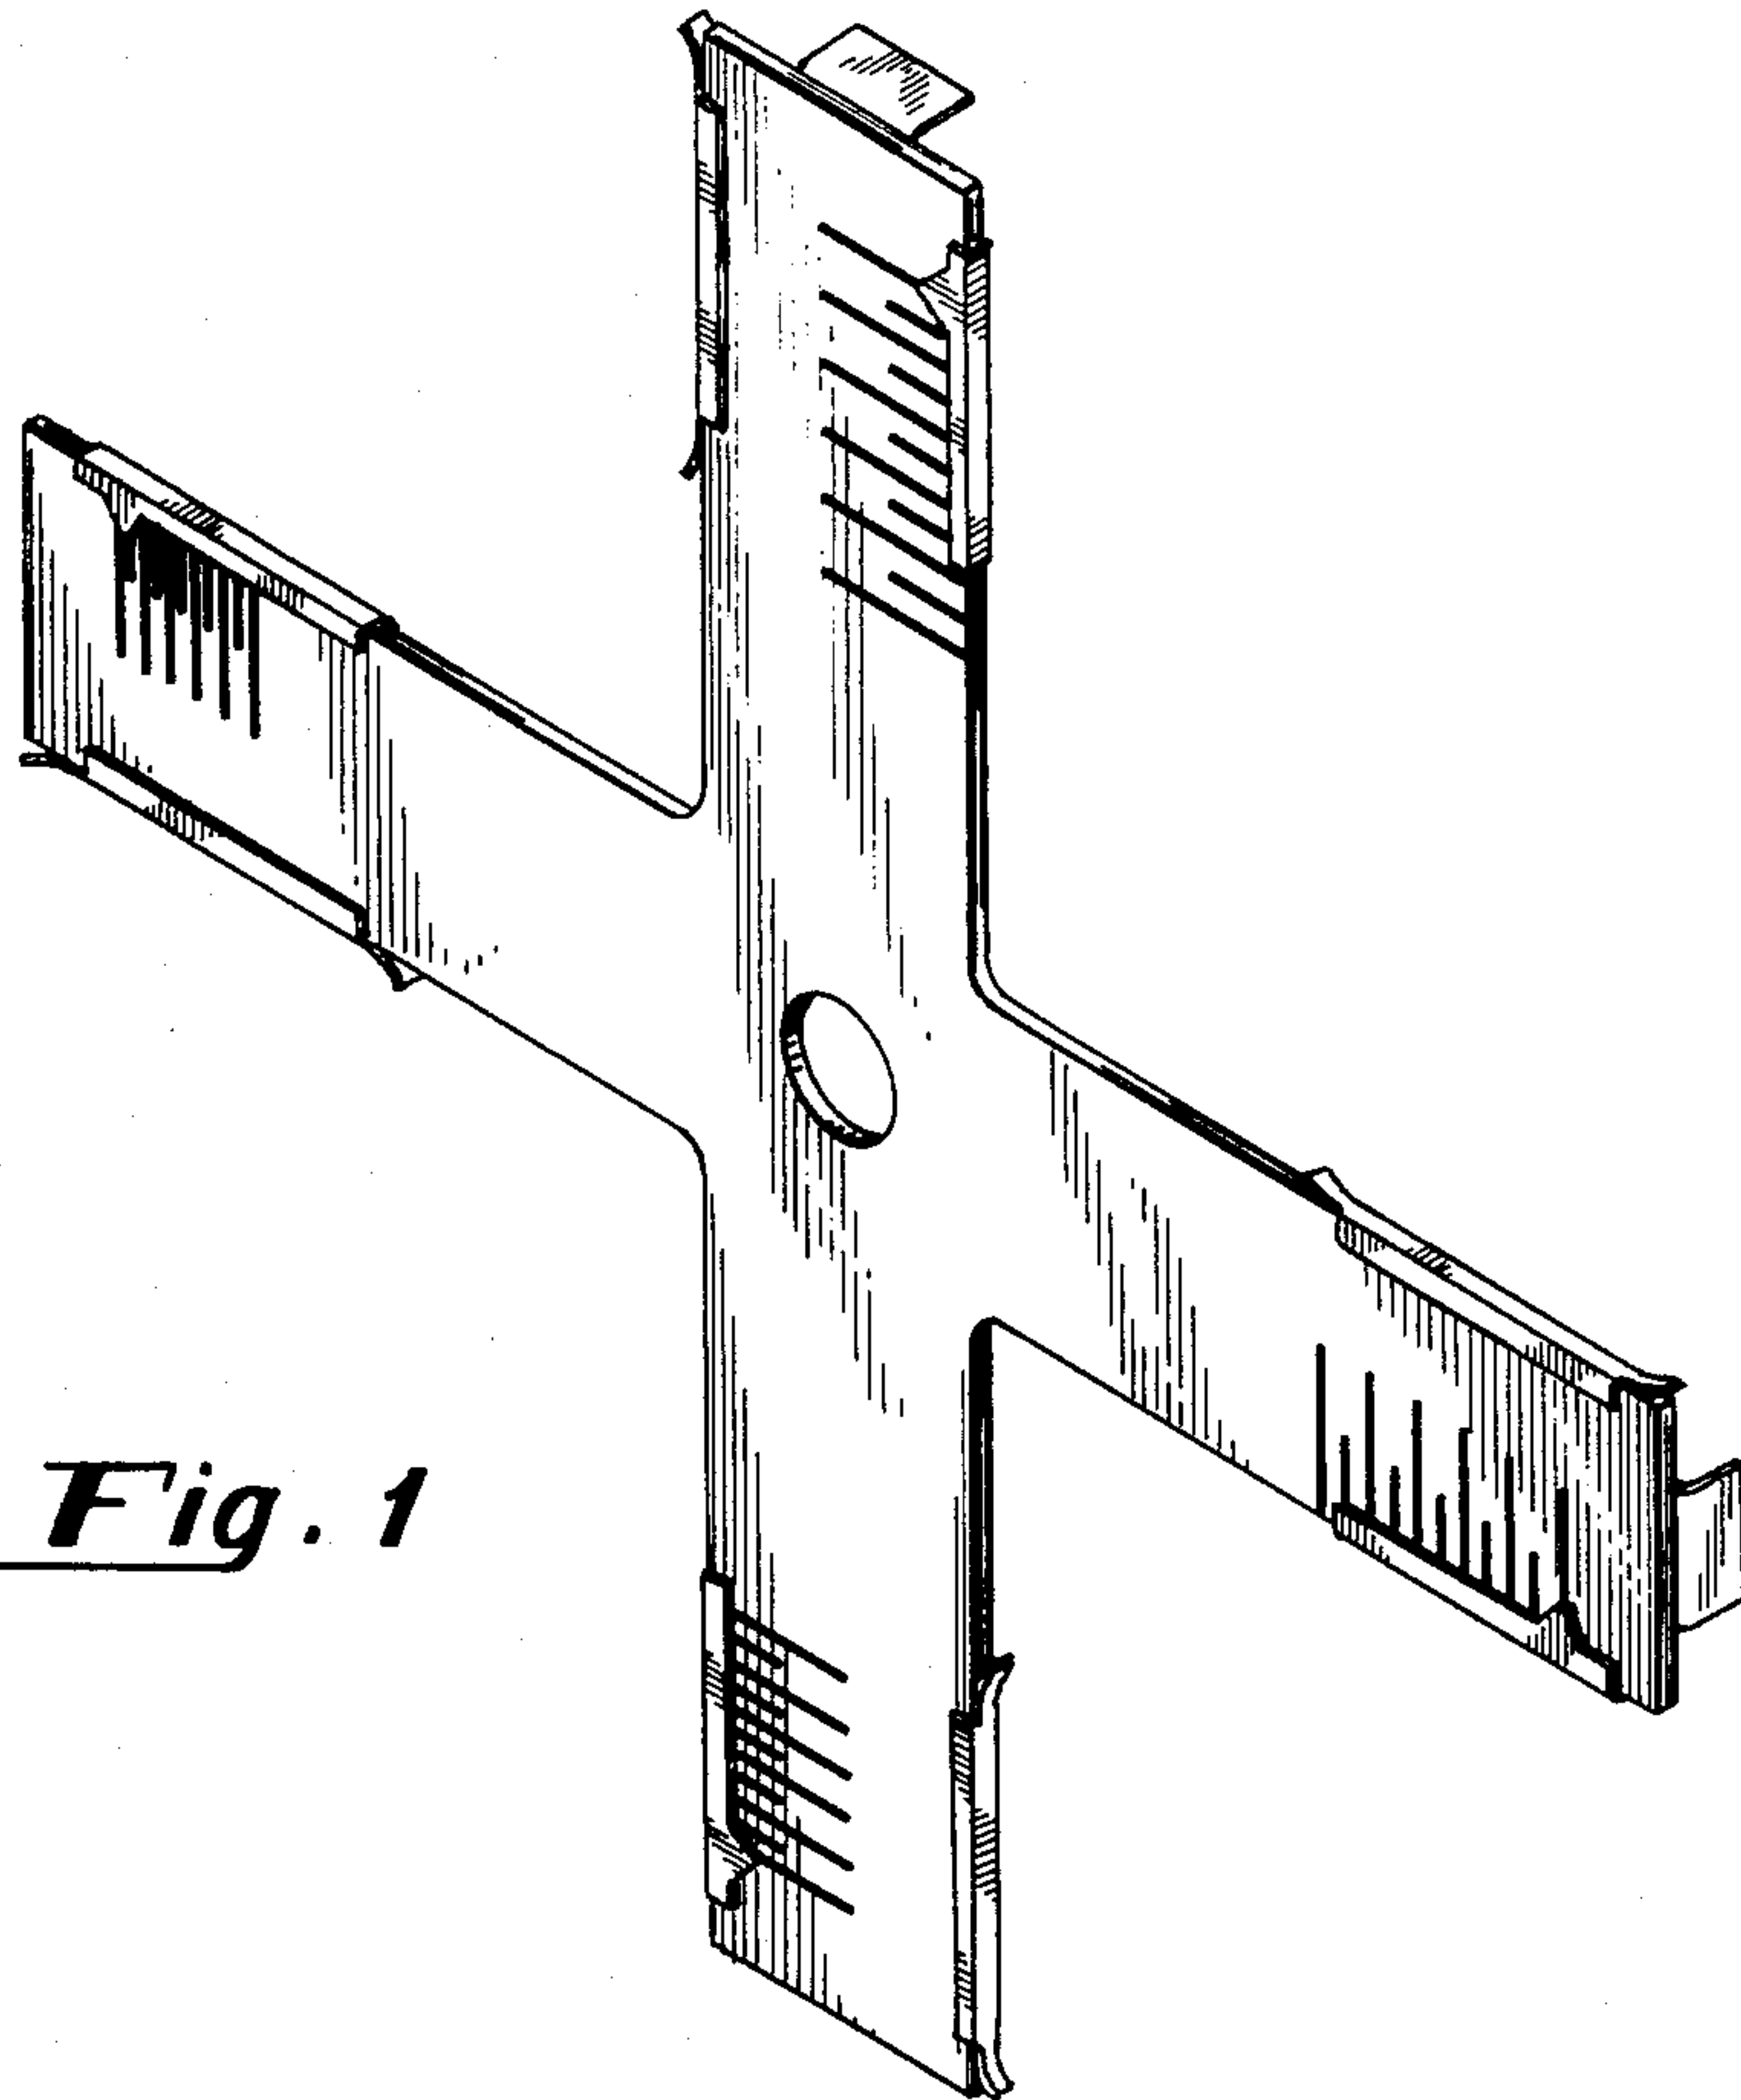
is a perspective view of a brake lining gauge showing our new design;
